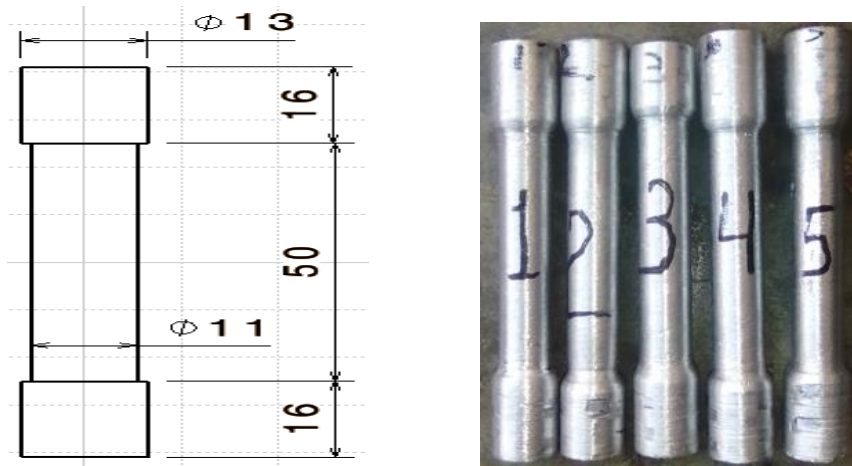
ASTM E-8 standard tensile specimens with circular cross-section
